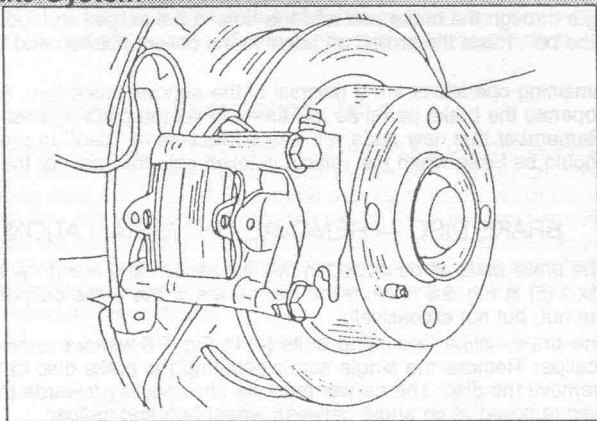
The two brake pads in fitted position, just before removal.
